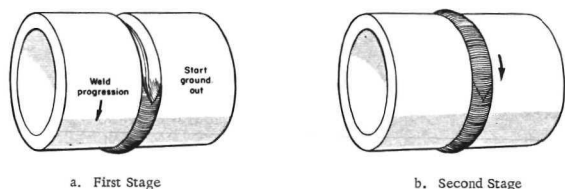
Step-back technique for overcoming cold-start difficulties when welding pipe with the gas-metal-arc-welding process.
